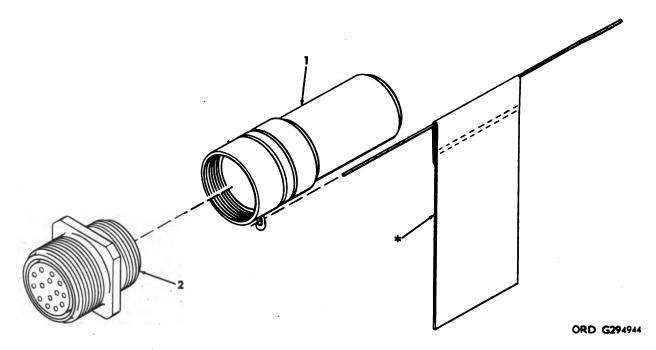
FITTING ASSEMBLY, BOOSTER THRUST /902R004/ /SFE FIGURE 144 FOR NEXT HIGHER ASSEMBLY/
